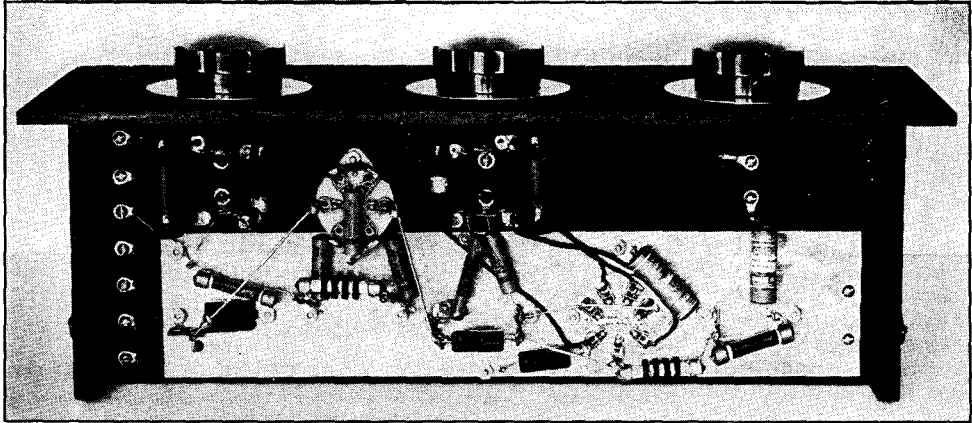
BOTTOM VIEW OF THE TWO-TUBE EXCITER
